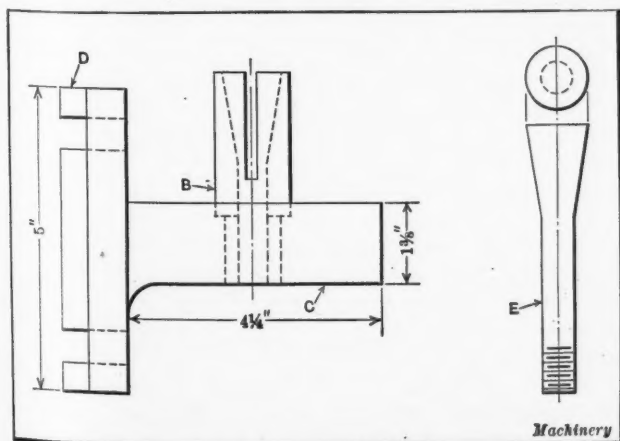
Simple Boring Fixture which may be attached to the Faceplate of a Lathe
